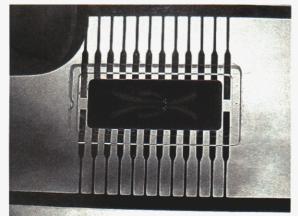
Top view of EMDIPTM manifold assembled to base. Note the six .008 inch diameter through holes
